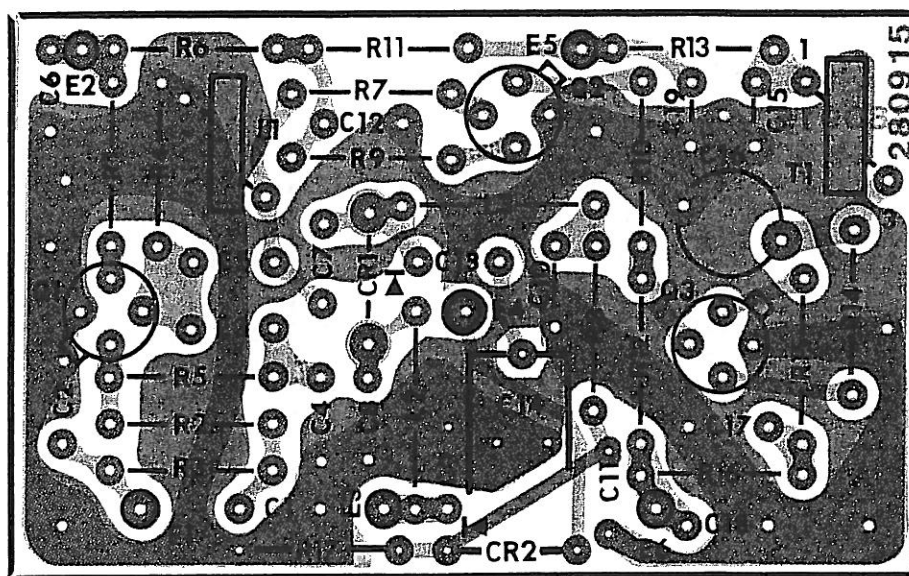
Part 280915-1 Sweep Oscillator Assembly (A2A3A1), Location of Components
